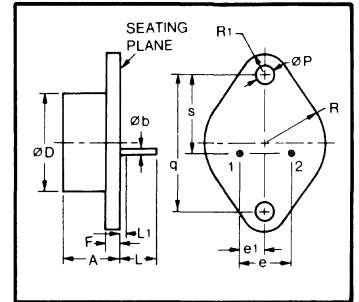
DIMENSIONAL OUTLINE JEDEC TO-204MA (Formerly JEDEC TO-3)
